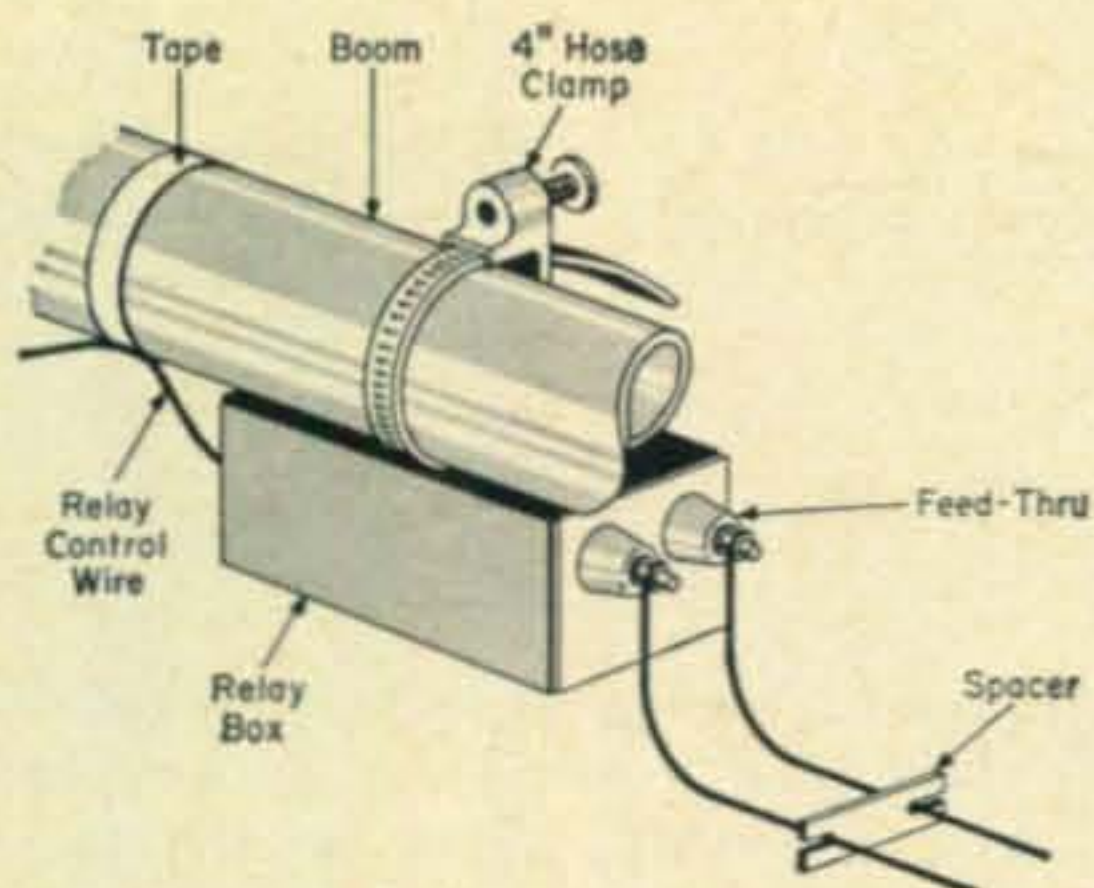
Mounting of the relay on the boom at the end of the stub. Relay coils should be fed power according to local electrical codes.
